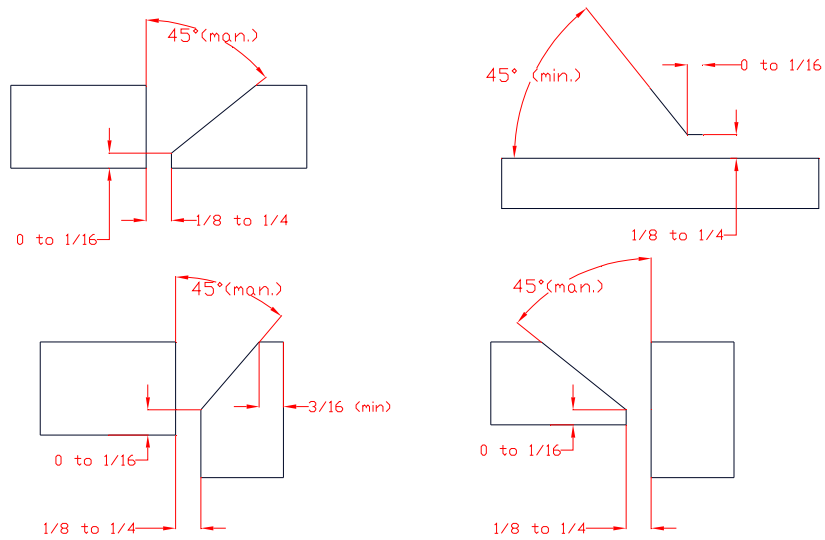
Single-bevel groove joints for welding one or both sides.
